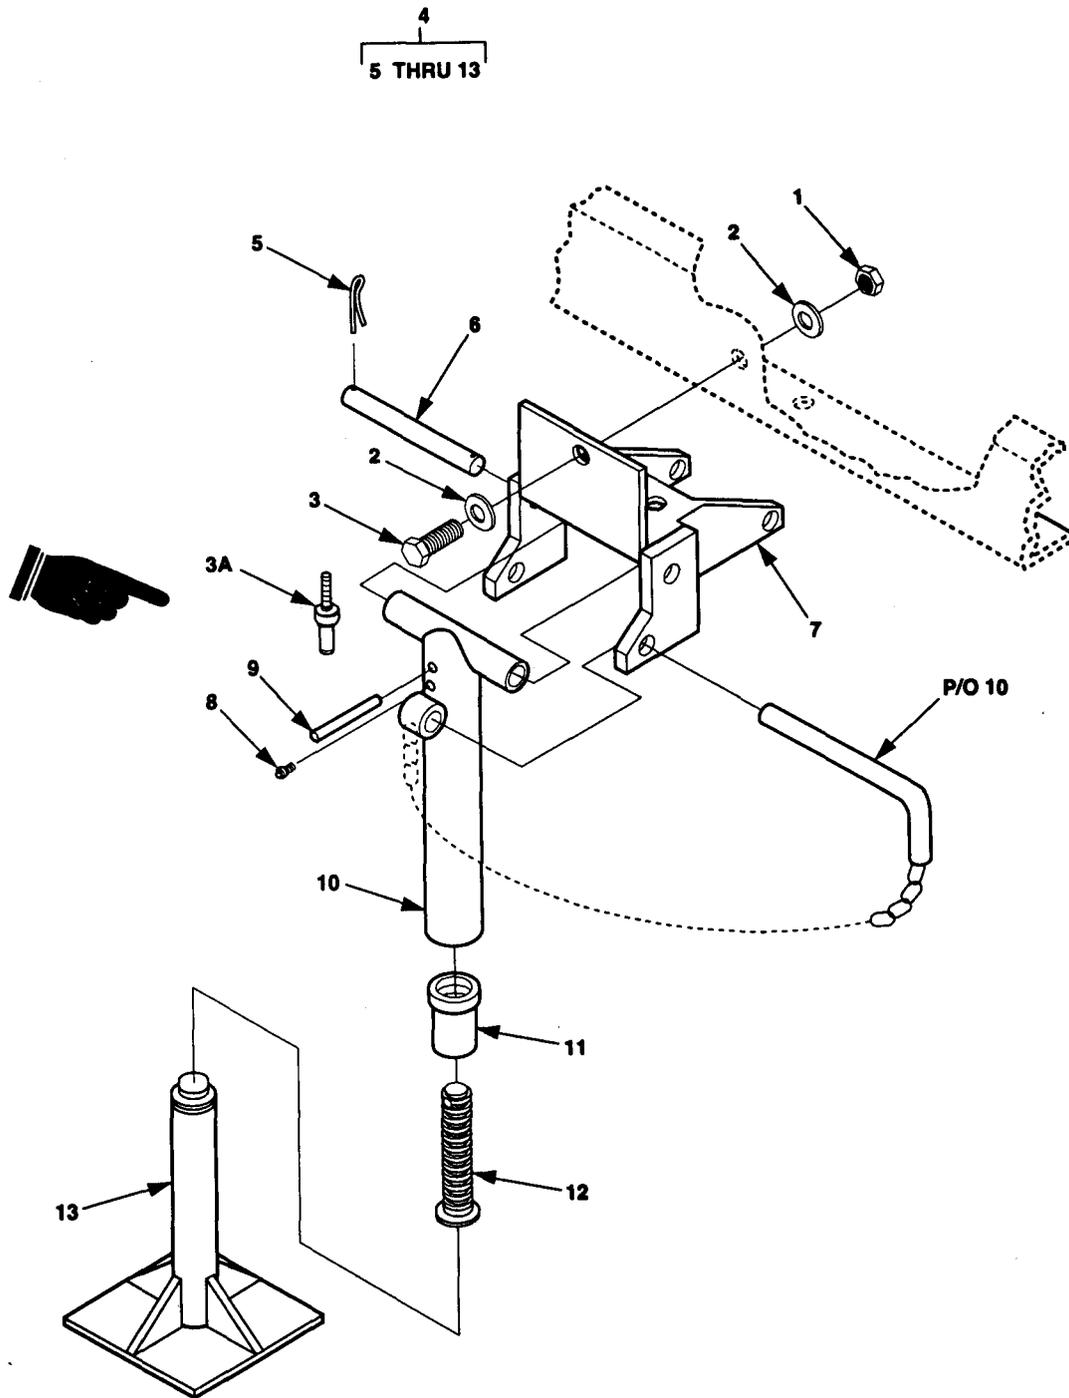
One Ton Trailer and HMT Leg Prop Assembly.
